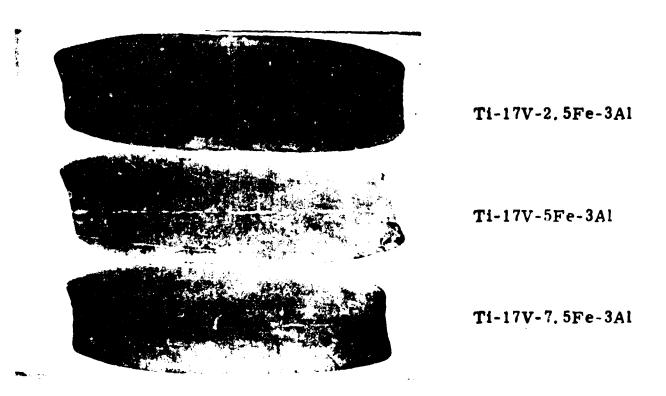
A (cont'd.). Appearance Of Sheet After Cold Rolling.
